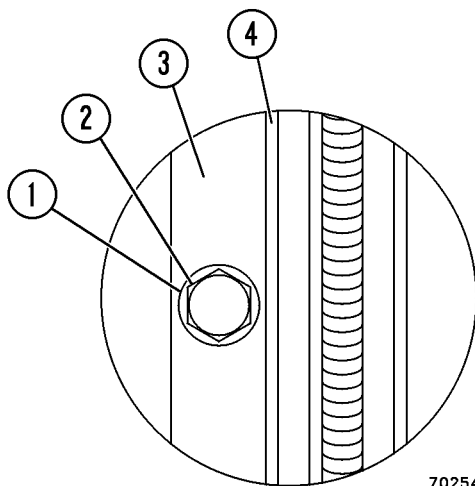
DOOR JAMB BOLT ADJUSTMENT
